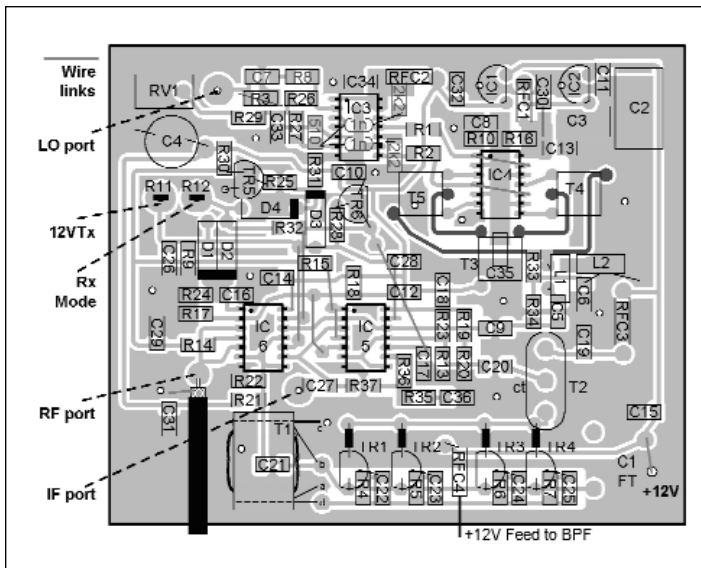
'Magic Roundabout' component layout (see Fig 8.55 in Appendix B for the PCB artwork). This board is designed to mate mechanically with the BPF assembly described next month. Components shown in blue are for the improved squarer. Track shown in blue may optionally be removed (see text) for the two-transformer H-mode mixer
